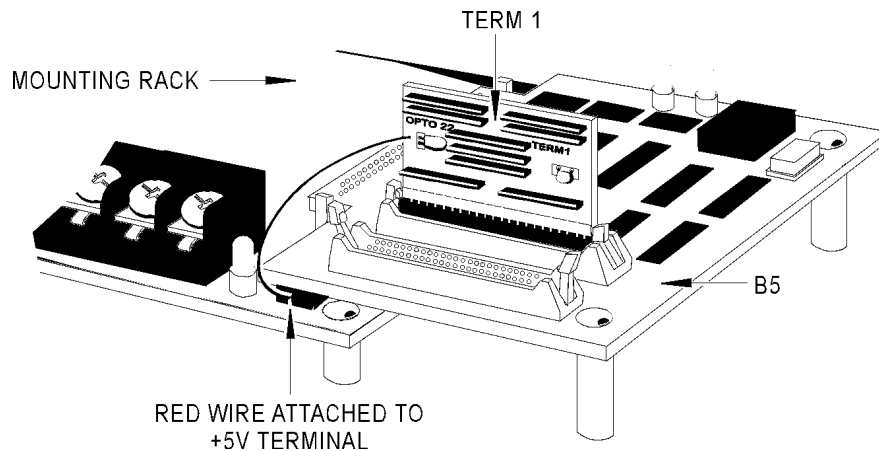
Terminator Board Installed on a B5-Compatible Mounting Rack
